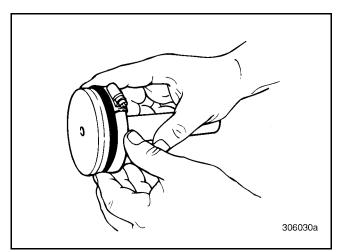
Installing a Shielded Hose Clamp to Compress the Teflon[®] Seal
